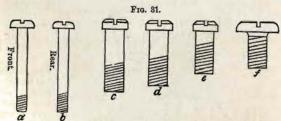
Lock-screws, full size, and side-screws, half size. a, b, side-screws; c, scar-screw; d, bridle-screw; e, scar-spring screw; f, tumbler-screw.
